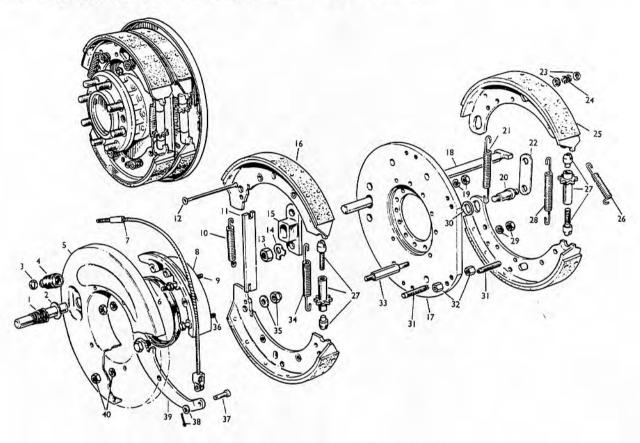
EXPLODED VIEW OF BRAKE UNIT
